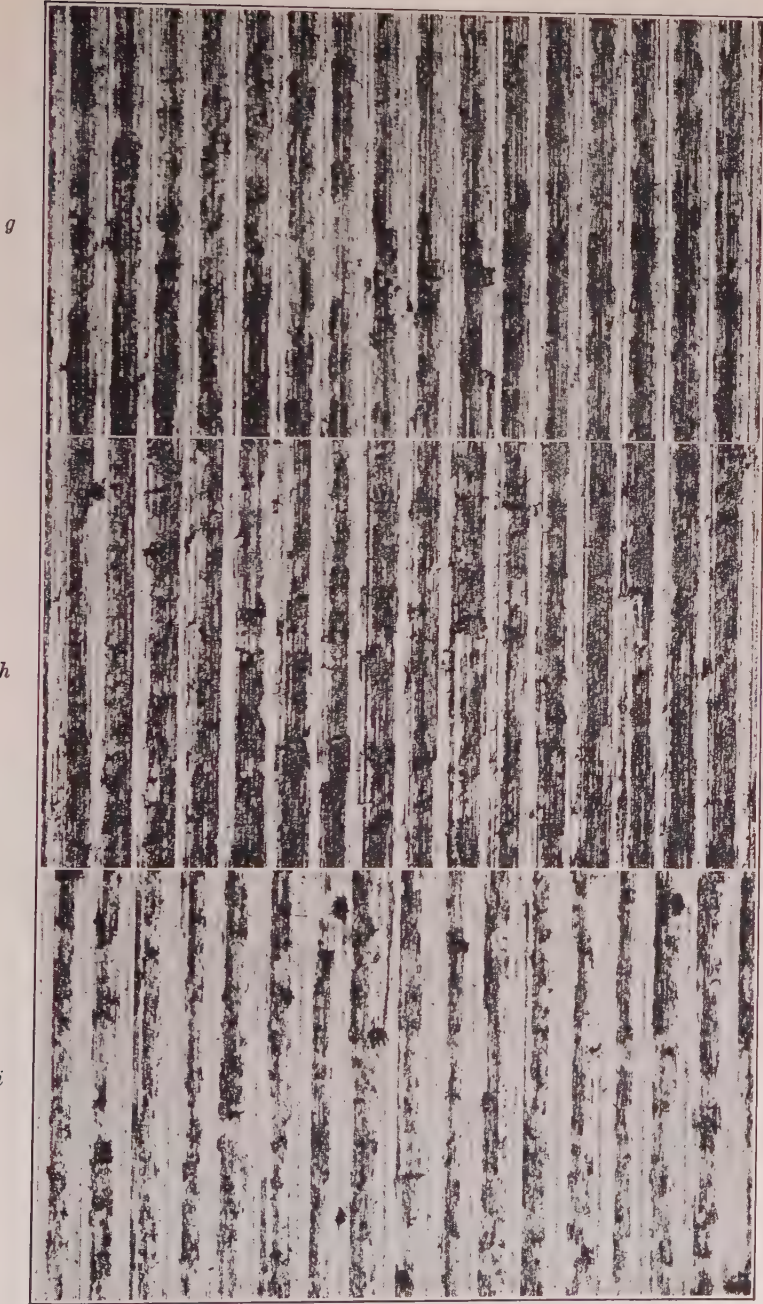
SURFACE FINISHES OF ALUMINUM ALLOYS MACHINED UNDER THE SAME CONDITIONS.—(Continued).
